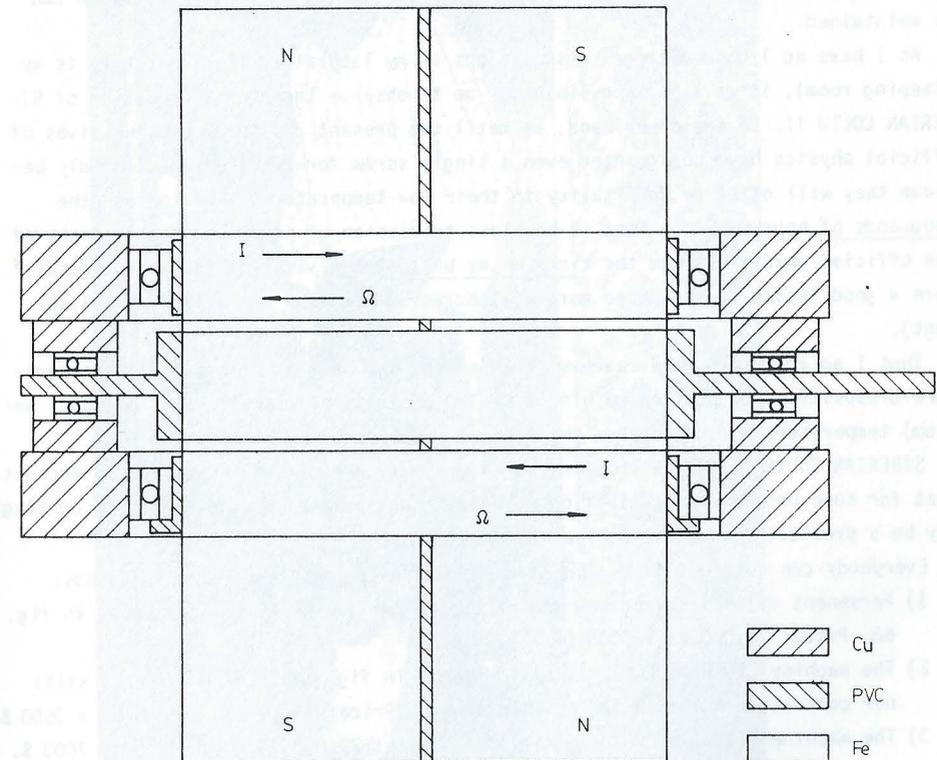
Drawing of the machine SIBERIAN COLIU II (perpetuum mobile without a single screw!).
